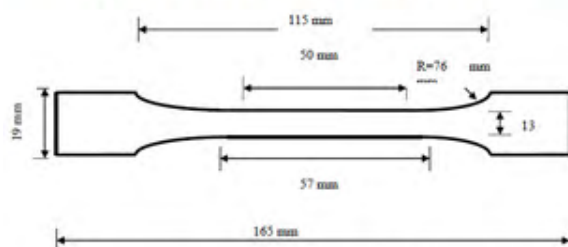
Geometry and dimensions of the tensile specimen used in the study.
